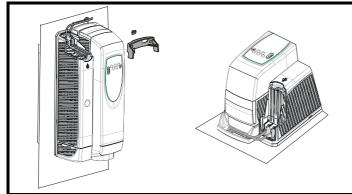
Connecting the brake resistor on a surface mounted size 2
